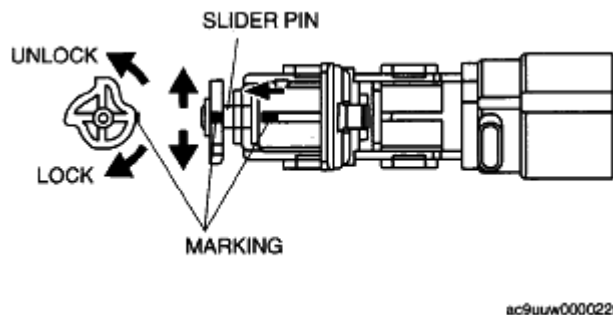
Pulling Slider Pin Outward Until It Contacts Brake Pedal Stopper Rubber
